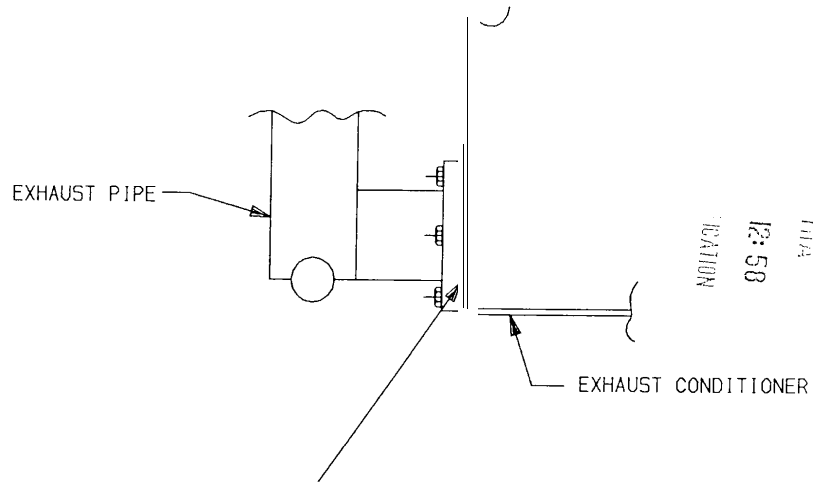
Gasket Between Exhaust Pipe and the Flange of the Exhaust Conditioner.
